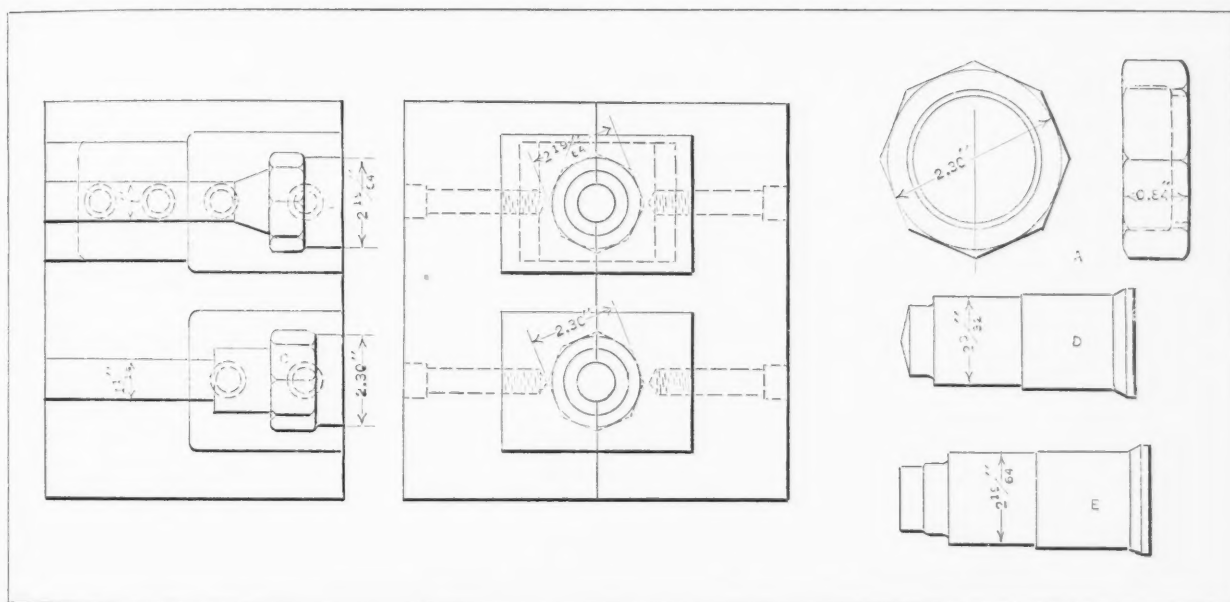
Design of the Dies and Tools Used in Producing the Pipe Union Nut
